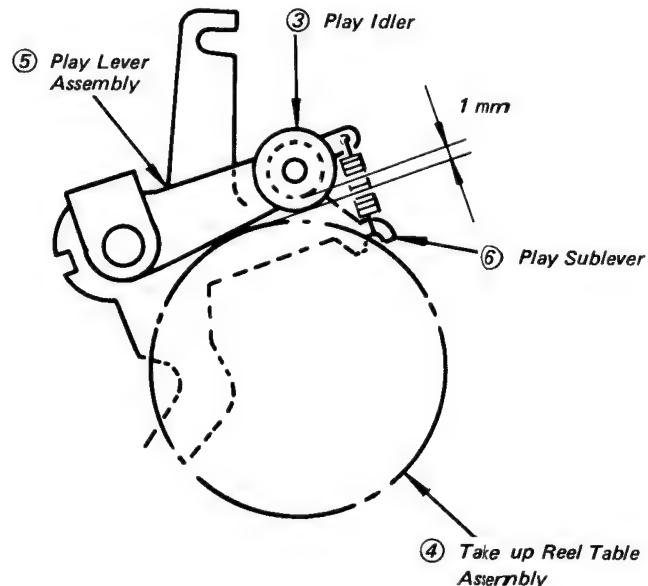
Clearance Required Between Outside of Lower Boss of Play Lever Assembly and End Surface of Play Sublever
